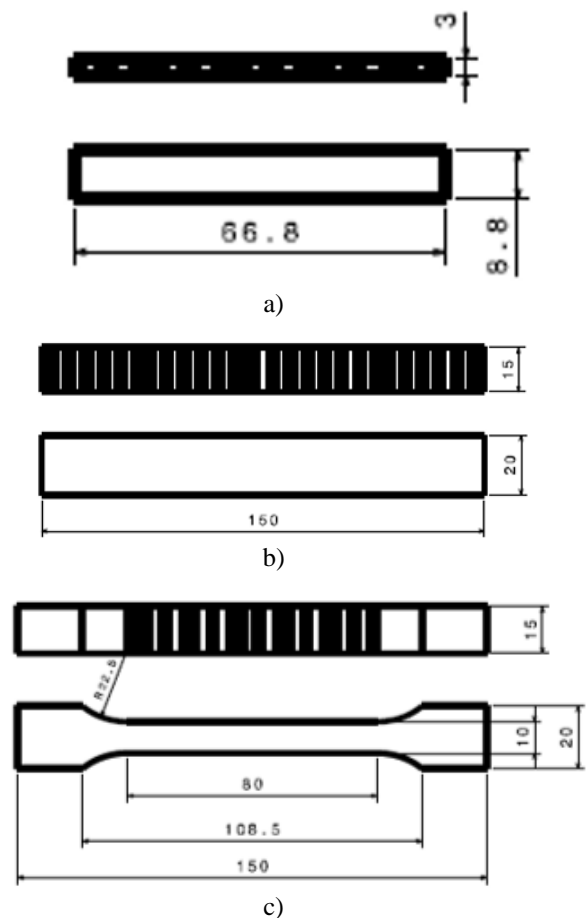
Overall geometries of the tested samples; a) DMA; b) Three-point bending; c) Tensile
